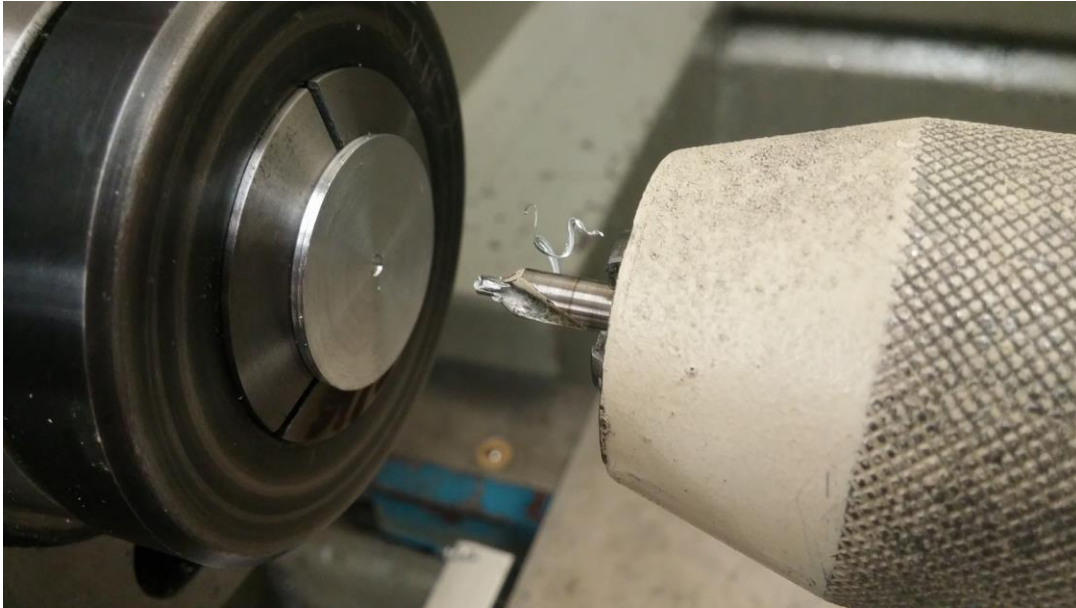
Again, this should be saved for after the insert is welded. However, it shows the concept of using a center drill at the first stage of drilling and tapping the insert.
